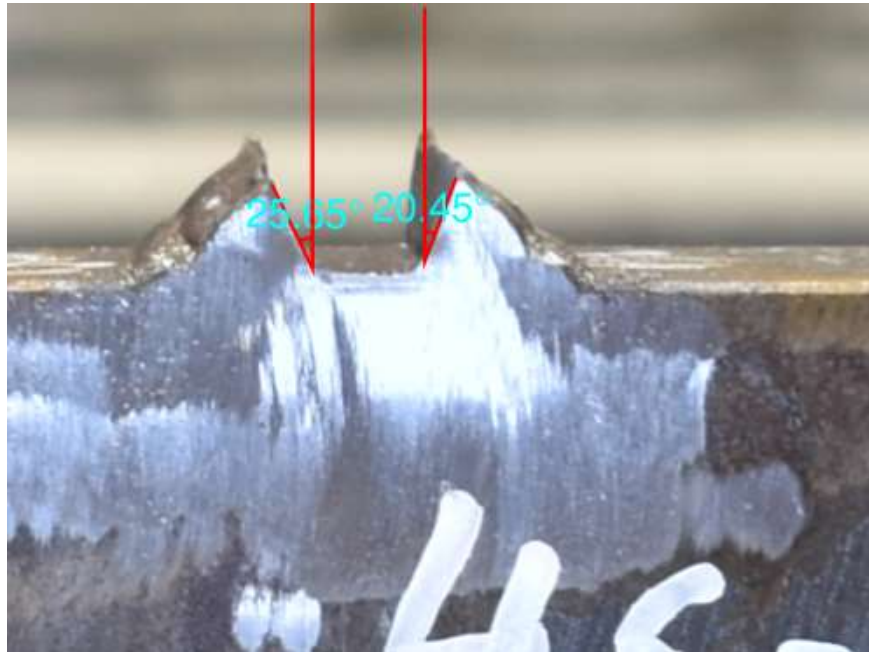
the fracture on weld of the sample FW8G0R1N4S2
